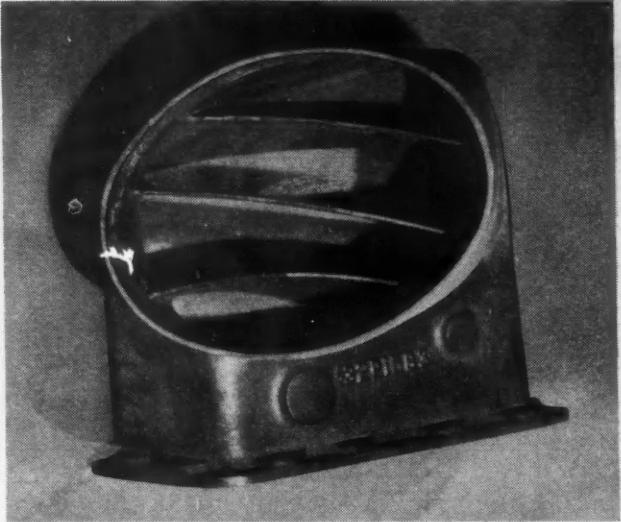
The carburetor air scoop in this photo was cast using the Antioch method for the veins and housing interior, and sand for the housing exterior. Originally a standard sand casting with the veins riveted to the housing, this part was redesigned with cast-in veins to prevent the rivets from shearing under high vibration. The improved casting technique also reduced the final cost of the part.
